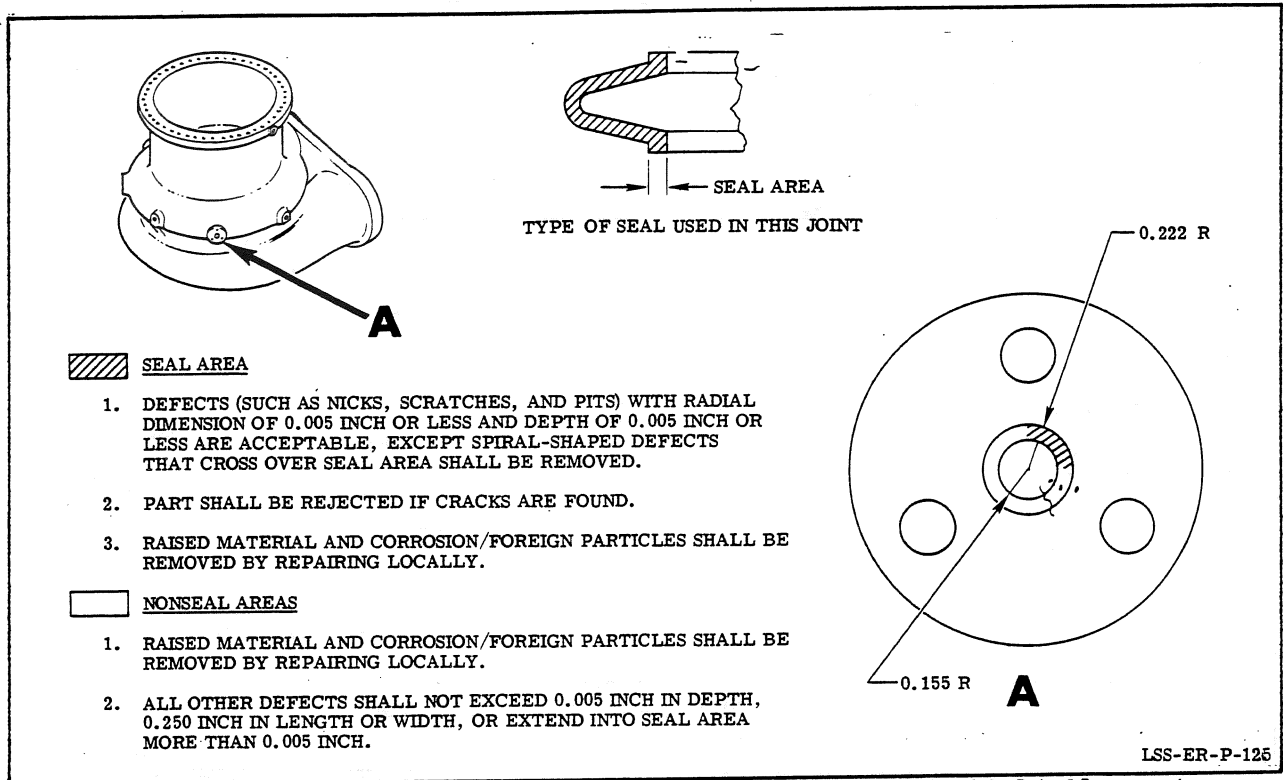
LPOTP Housing RS007802 Turbine Drive Manifold Closeout Disc RS007836 Seal Surface Inspection Guide (Joints 01.2 and 01.3)
